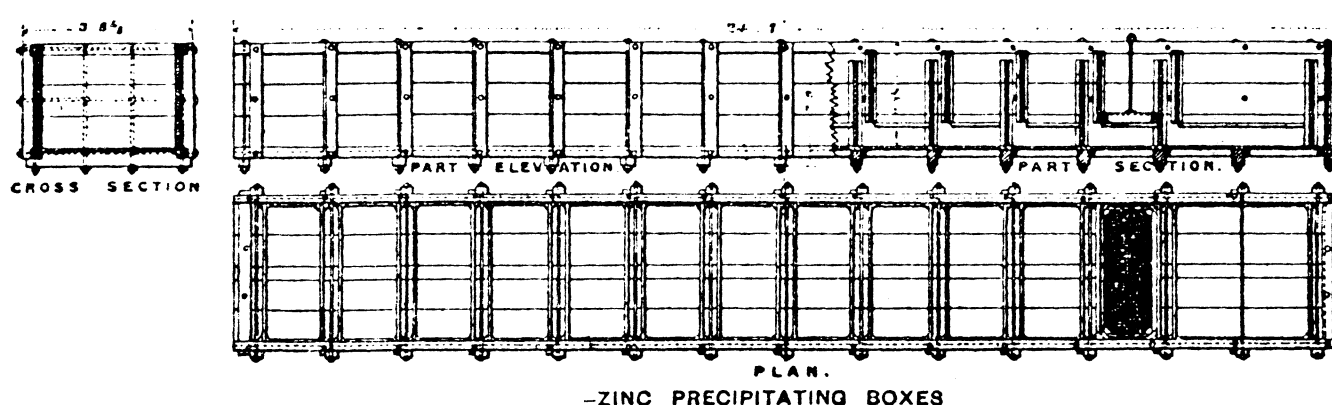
Plan and elevation of zinc precipitating boxes (source unknown).
